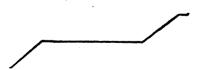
Element of Wave Winding Formed from a Strip of Copper
